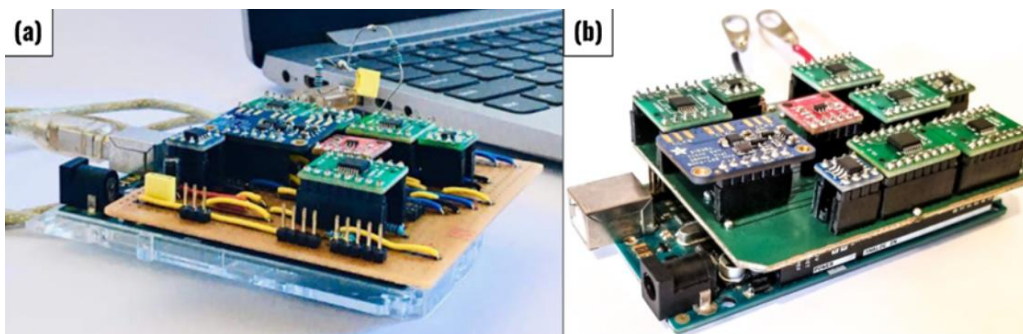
Simple-Z circuit fabricated using (a) stripboard and (b) PCB.
